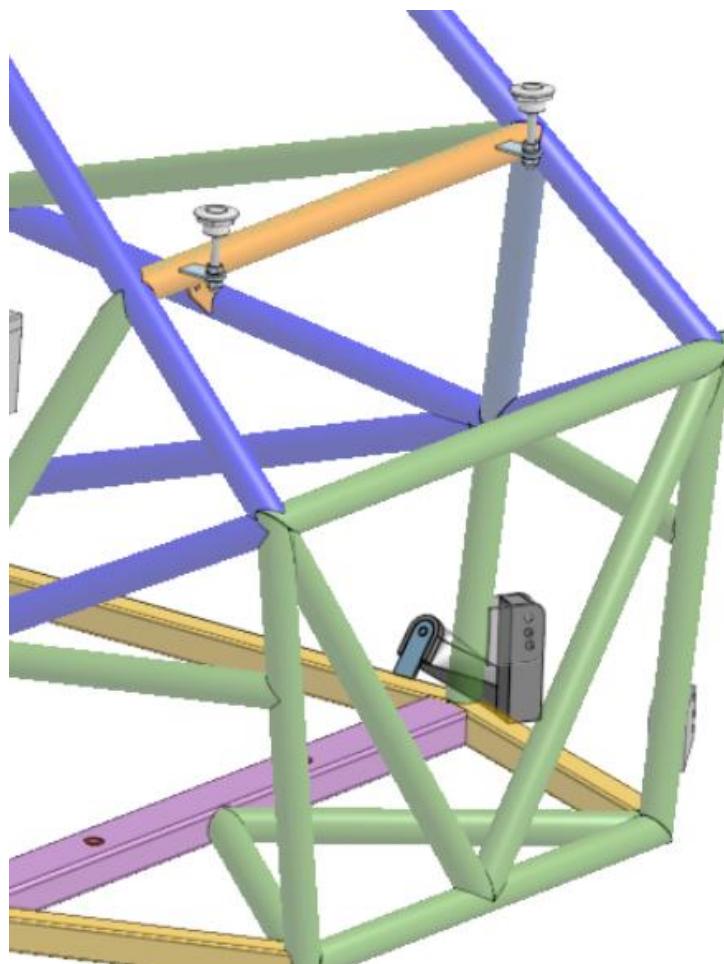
Body Kit Tab Jig - Suspension Pickup Example
